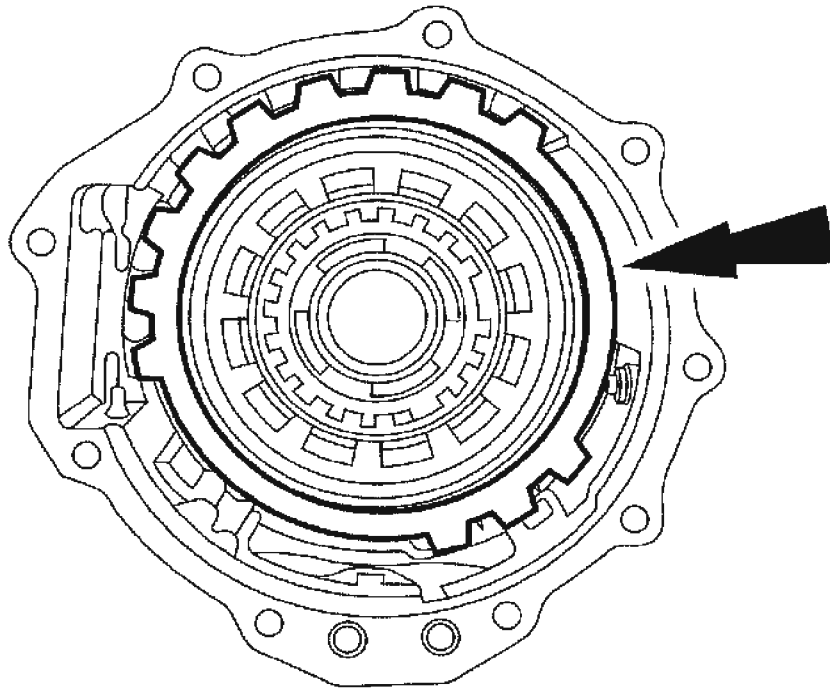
Removing Low/Reverse Clutch Plate Retaining Ring
